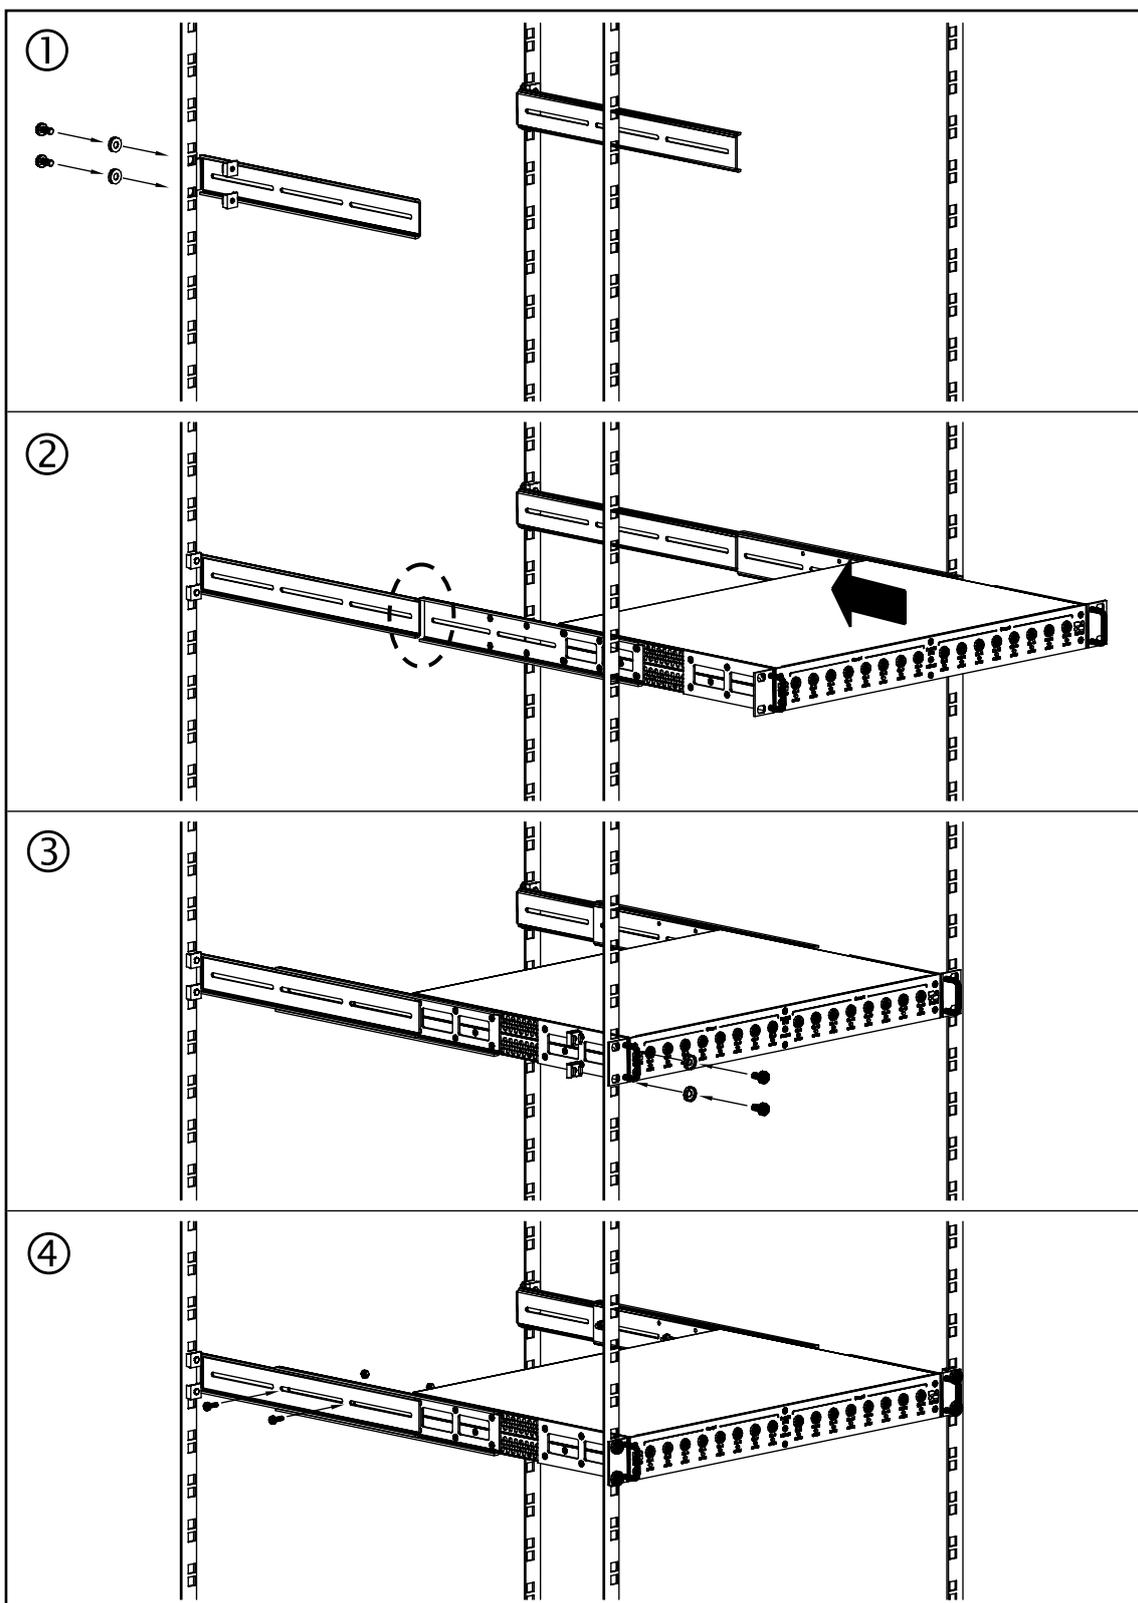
Final Steps to mount the ProDAQ 5720 in a 19" Rack
